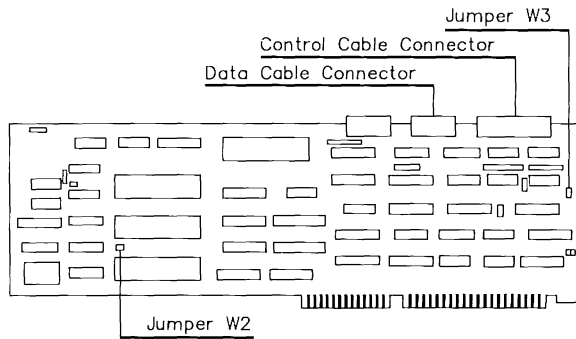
ESDI Fixed Disk Drive Controller Board
